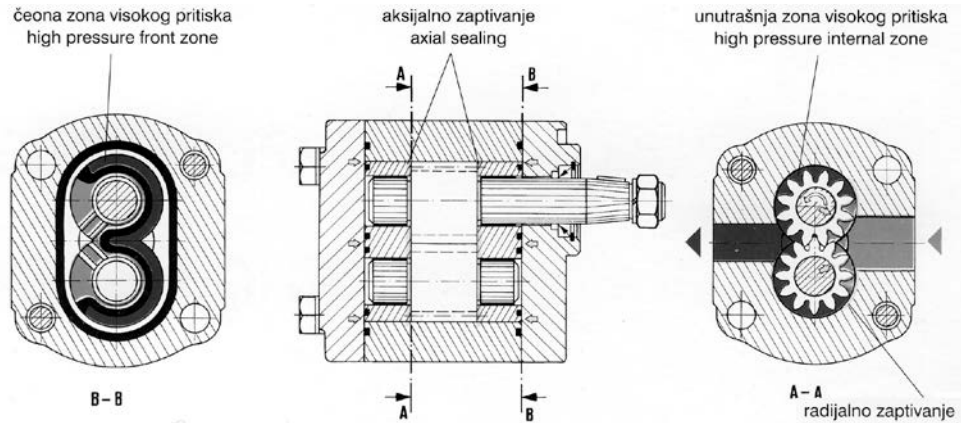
Cross-section of gear pump with external gearing (family 3115..)
